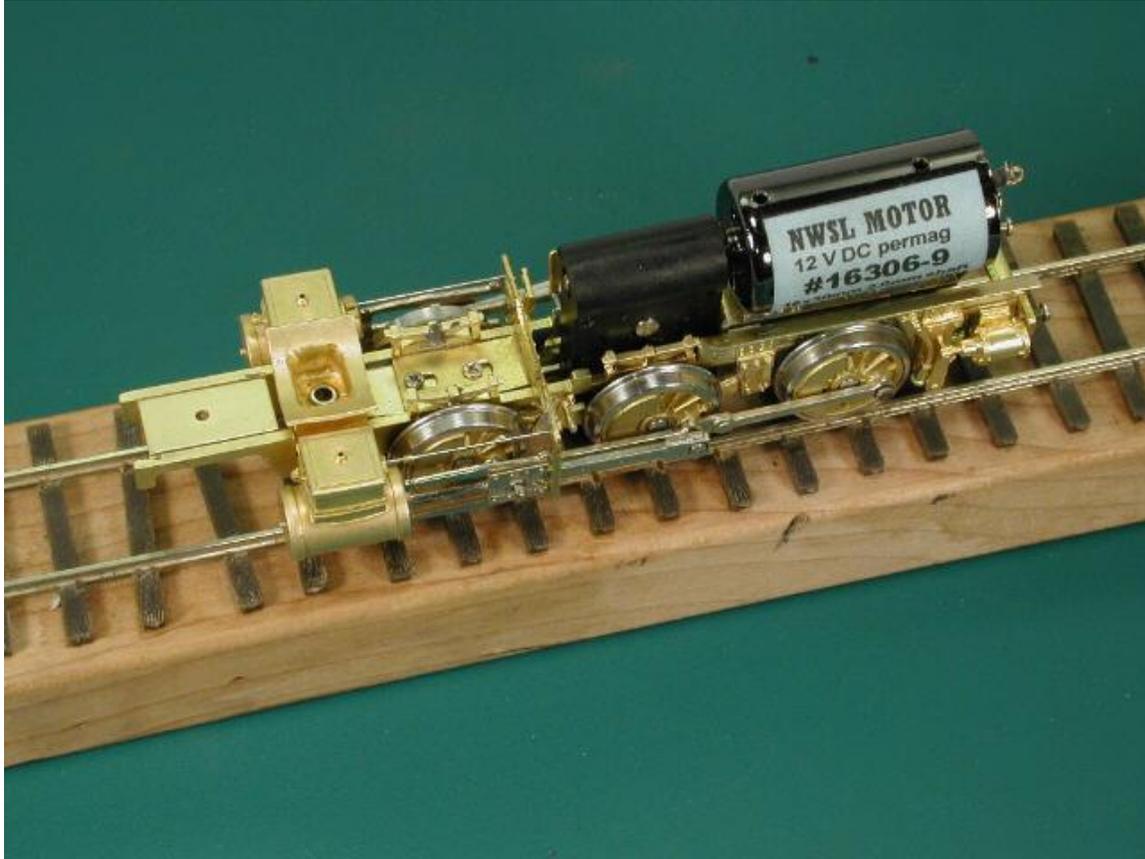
Before attaching the gearbox to the mechanism, a small amount of silicone grease was applied to the gears. After attaching the gearbox and torque bar to the mechanism, a small amount of oil will be placed on all bearing surfaces: crosshead guides, side rod screws, etc.. Next we will prop up the mechanism on a couple of pieces of wood to clear the drivers, apply a few volts of DC, and run the locomotive in for about 15 minutes in each direction. Perfection !!!
